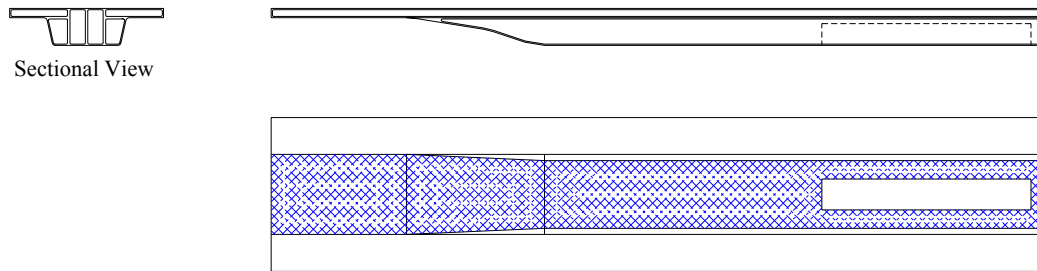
(b) Alternate Chassis Layout of Concept Two
